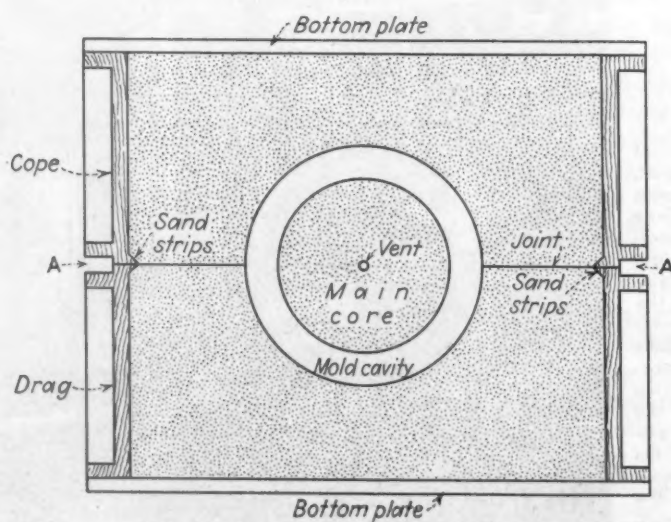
Cross-section view of a roll mold shown in Fig. 1. Note the sand strip and flange at A for chalking.
